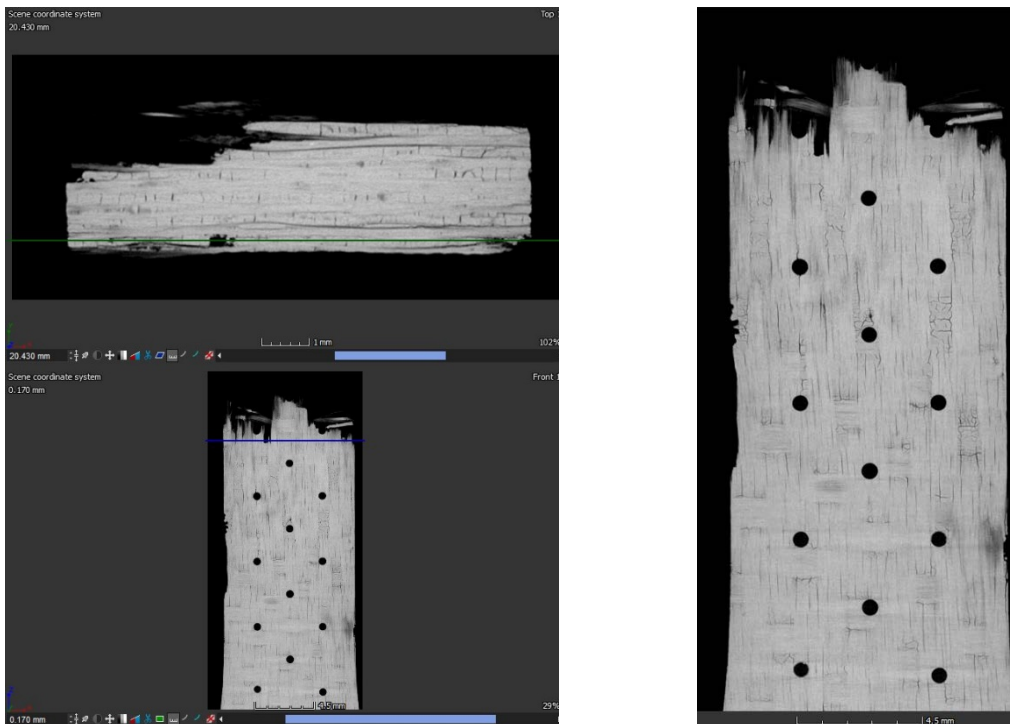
2D (x-z plane) vs 2D (x-y plane) location showing damage zone at Step 2 for specimen #3, tested in tension to failure at 1200°C in air
